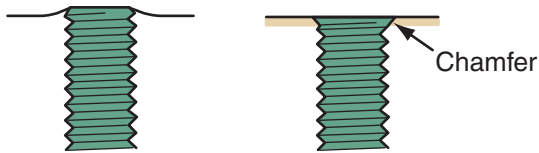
Bolt hole threads can pull up, leaving a raised edge. Also, if the block has been resurfaced, the threads may run up to the surface. In either case, the hole must be chamfered.
